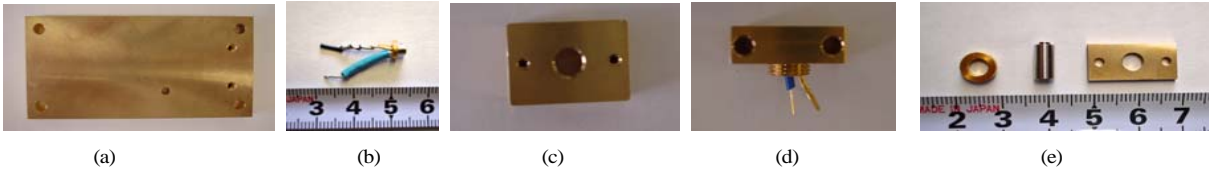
Components of the laser diode module. (a) a brass base plate(40mm×80mm) , (b) a laser diode, (c)a holder plate, (d) the attached laser diode to the holder plate and (e) a lens holder, the first lens attaching to the laser diode and a plate with screws
